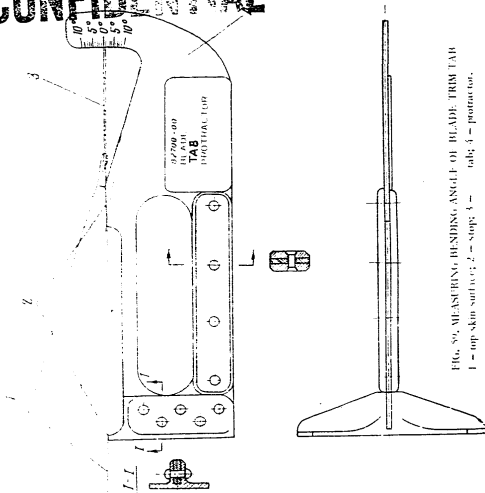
MEASURING BENDING ANGLE OF BLADE TRIM TAB.
